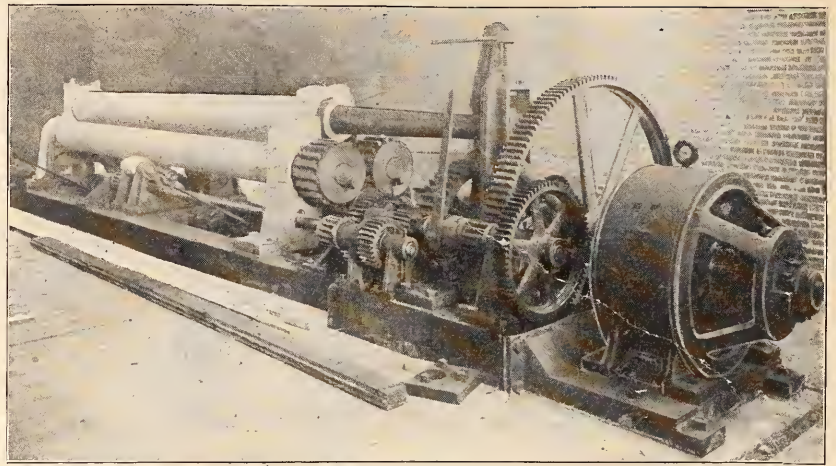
NILES 12-FOOT BOILER SHEET ROLLS, DRIVEN BY 26 H. P. WESTINGHOUSE MOTOR—TERMINAL R. R. OF ST. L.
